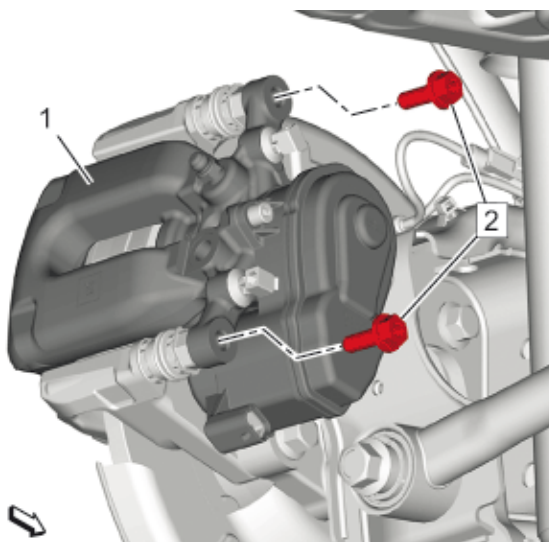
Rear Brake Caliper And Guide Pin Bolts
